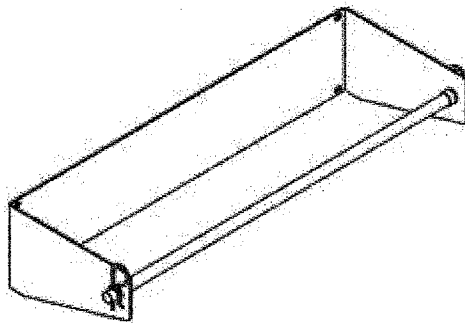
Cable Reel Rack (wall mounting version)
